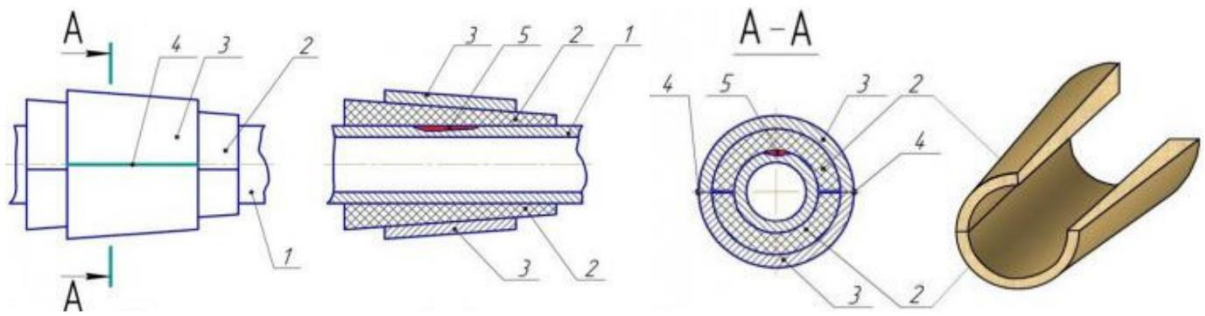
The design of the KONUS coupling: 1 - pipeline; 2 - composite clutch; 3 – steel shell; 4 - welded seam; 5 - blind defect
